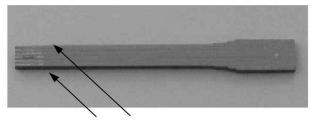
Premature shear failure of ASTM D638 standard test specimens with longitudinal roads
